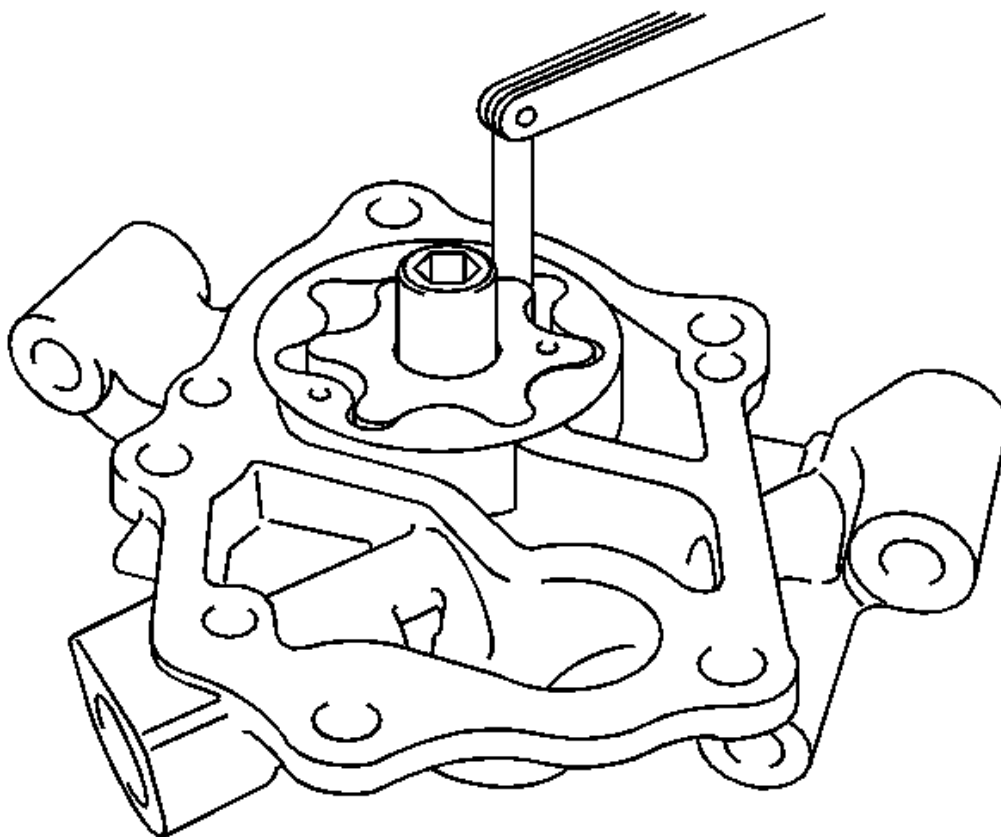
Measuring Oil Pump Drive & Driven Rotor Tip Clearance
